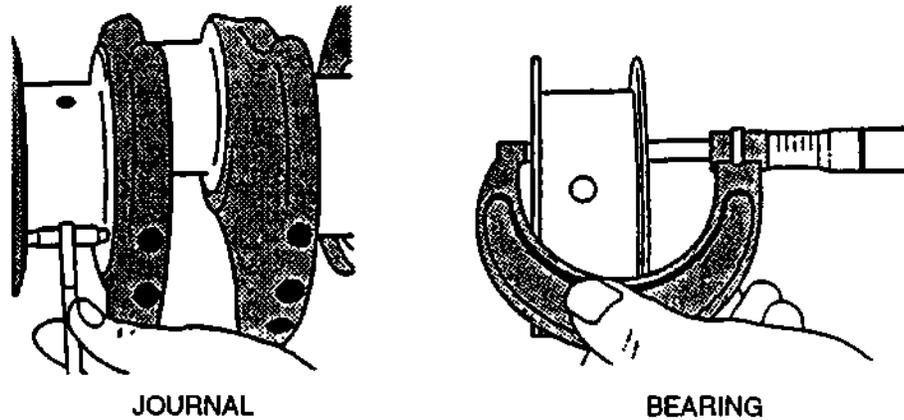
Measuring Main Thrust Journal and Thrust Bearing Width
